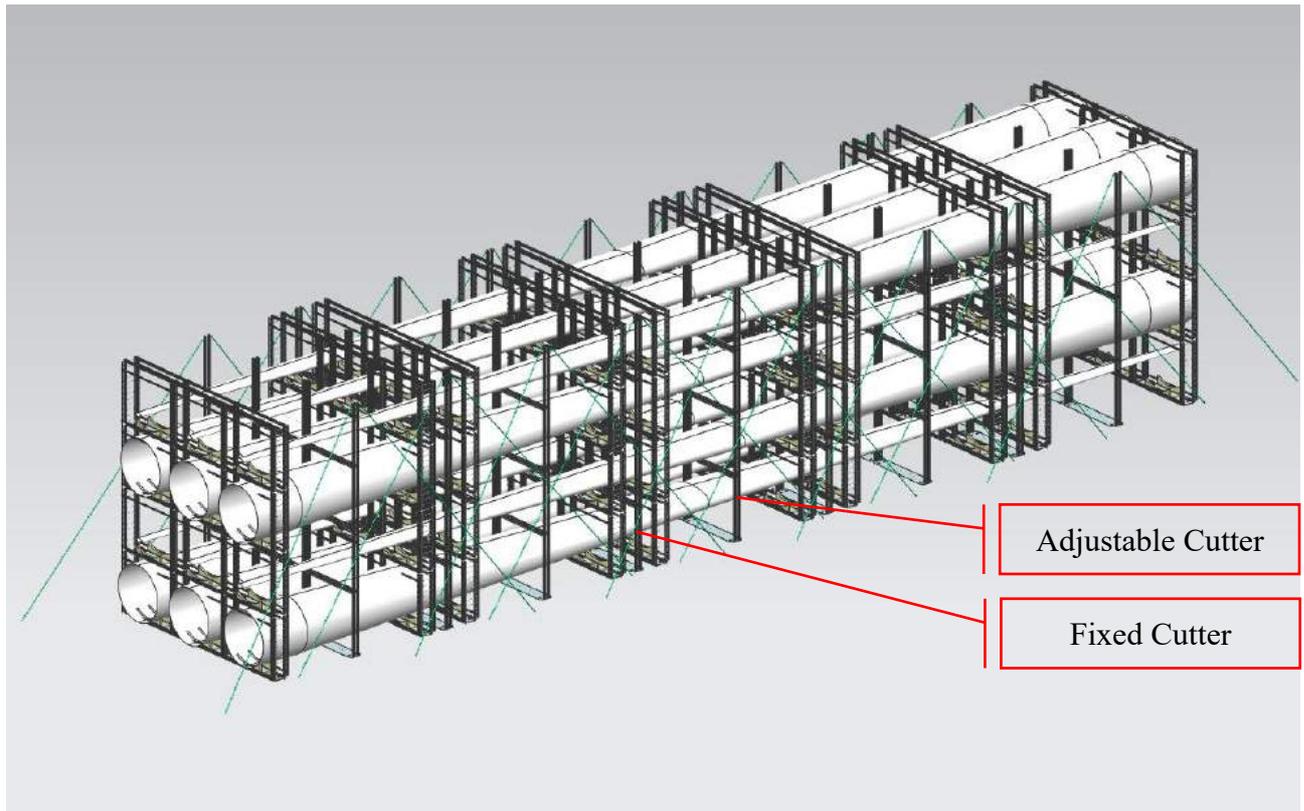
12 MW blades inside the racks (Ready for cutting)
